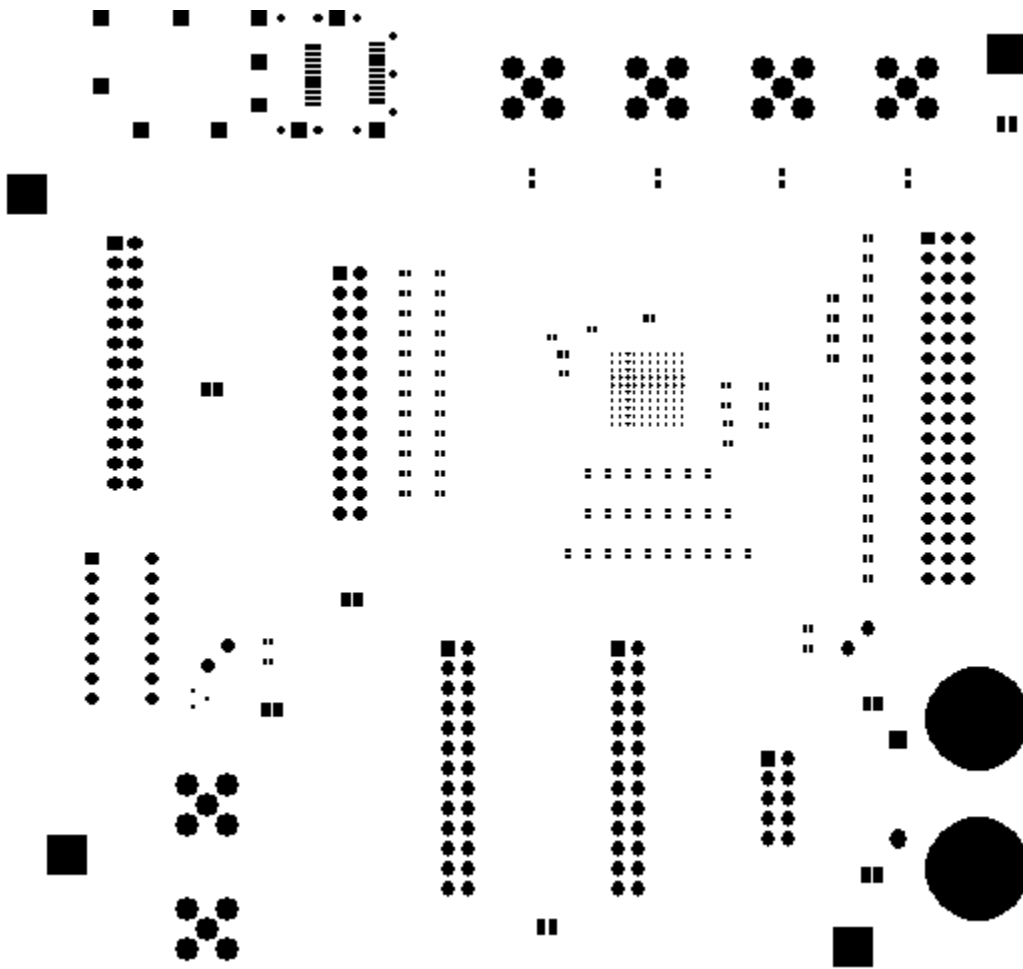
CYP15G0101DXB-EVAL Top Layer Solder Mask Layout
